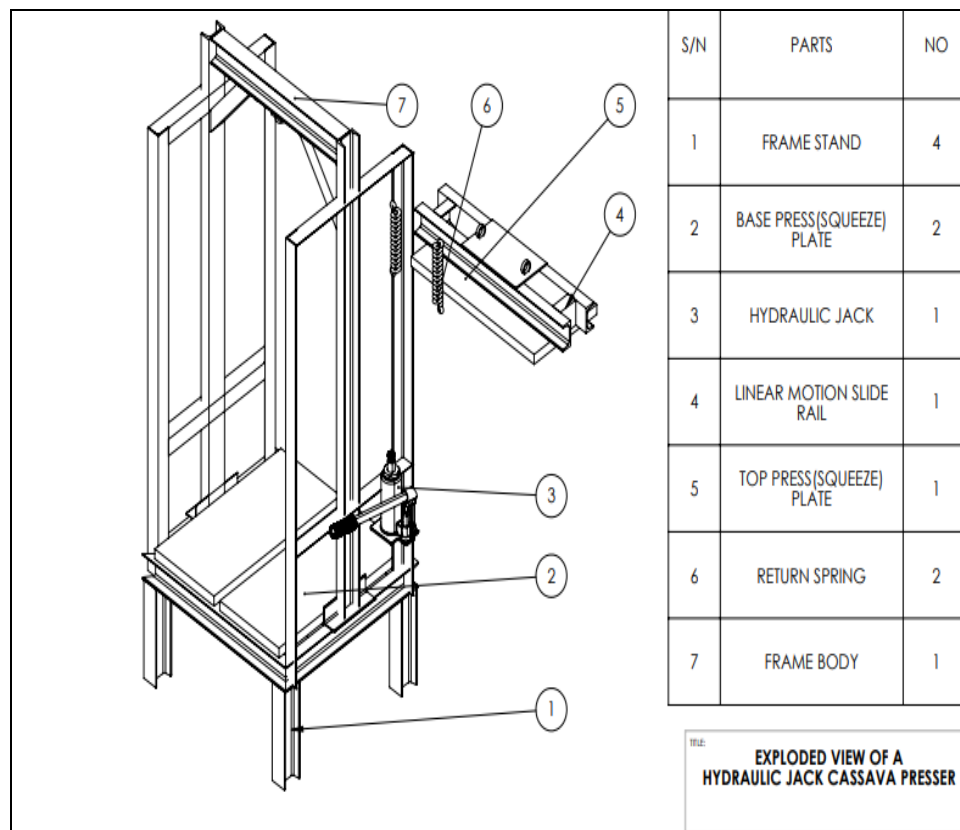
Exploded Drawing of Cassava Mash Dewatering Machine
